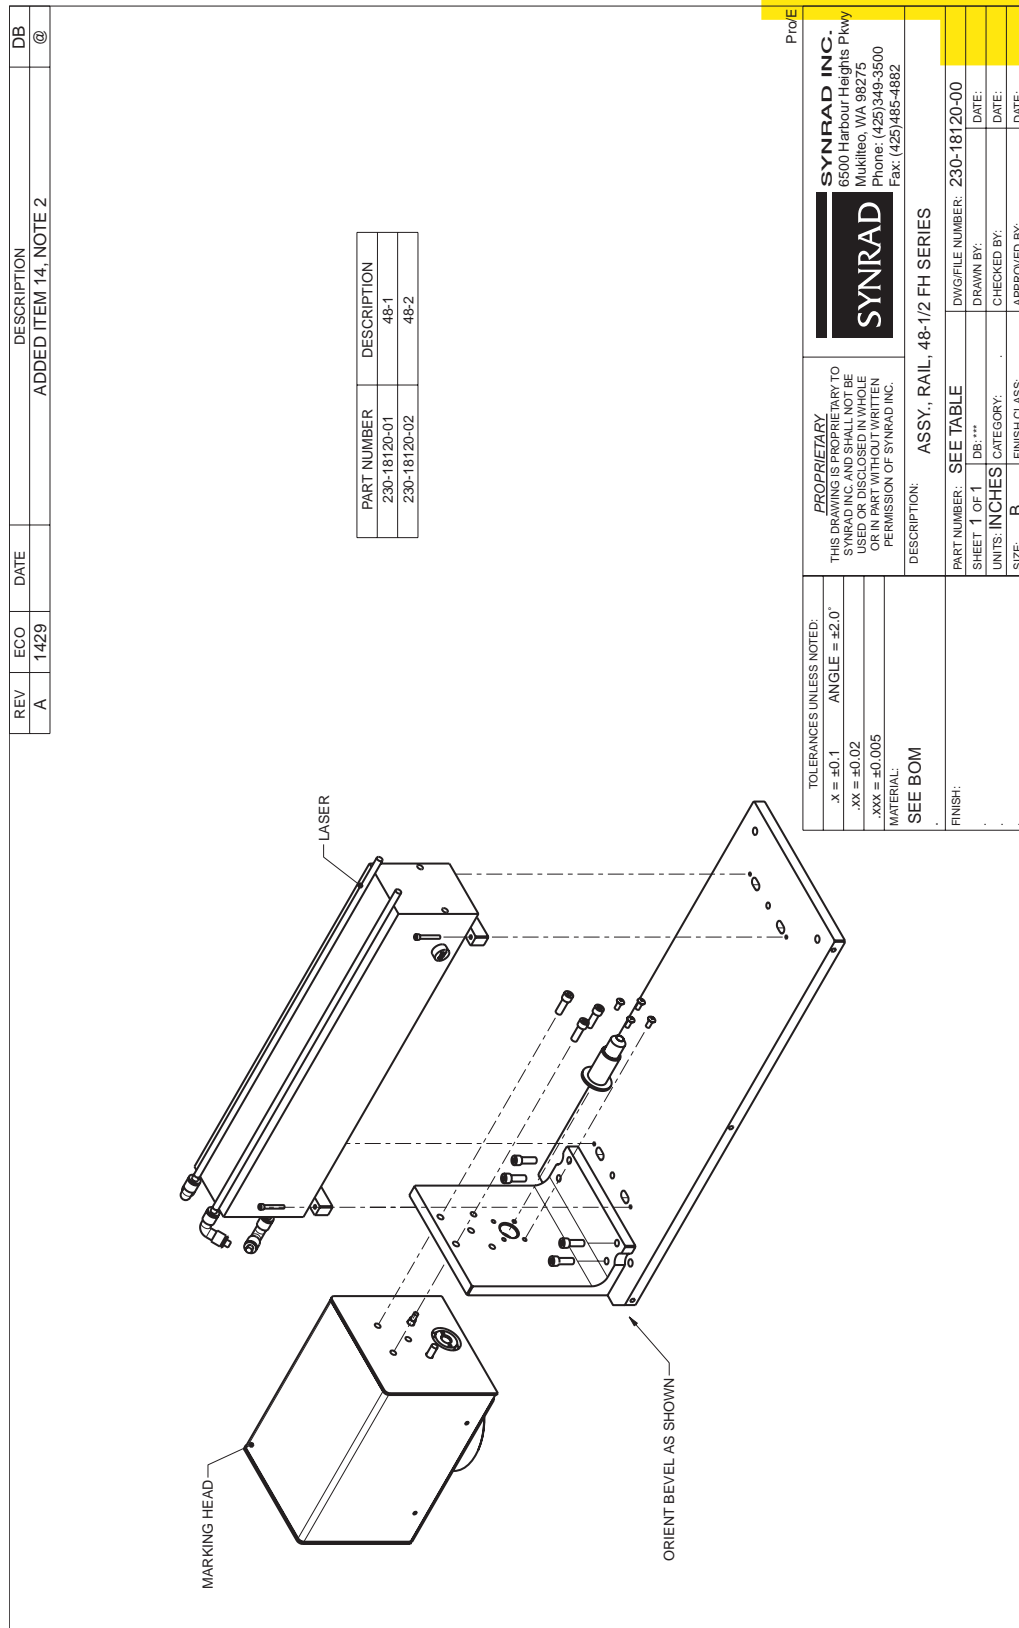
FH Head / Model 48-1/48-2 mounting drawing
